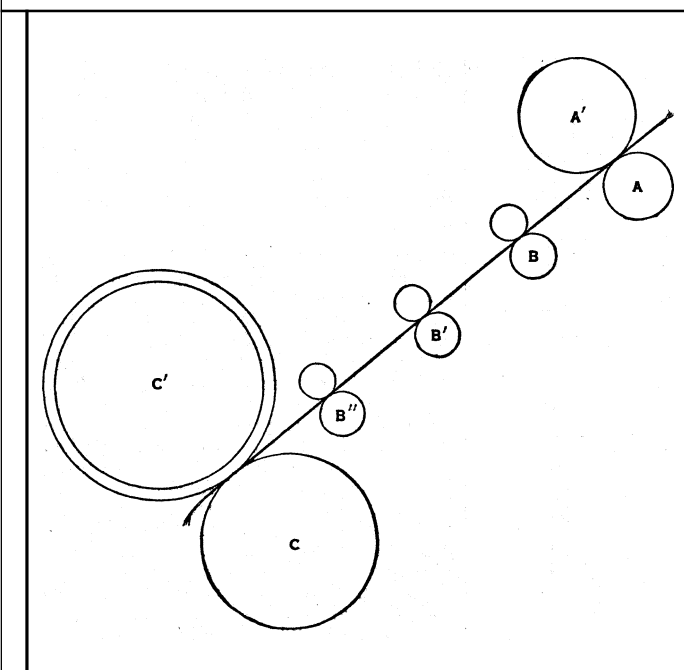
SECTION OF WOOL DRAWING ROLLERS
